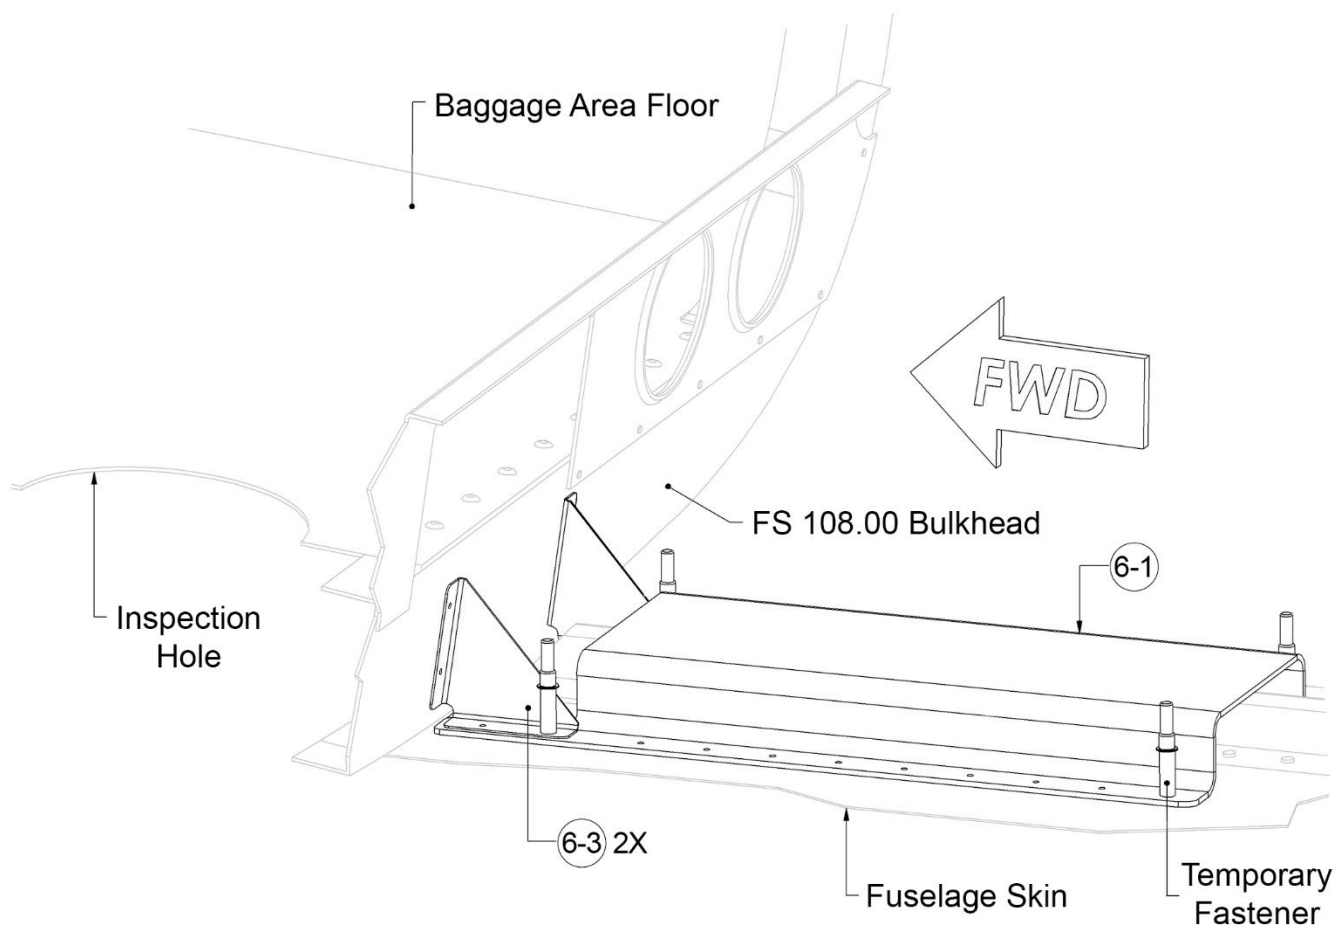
Base Bracket and Angle Brackets Positioned for Drilling
